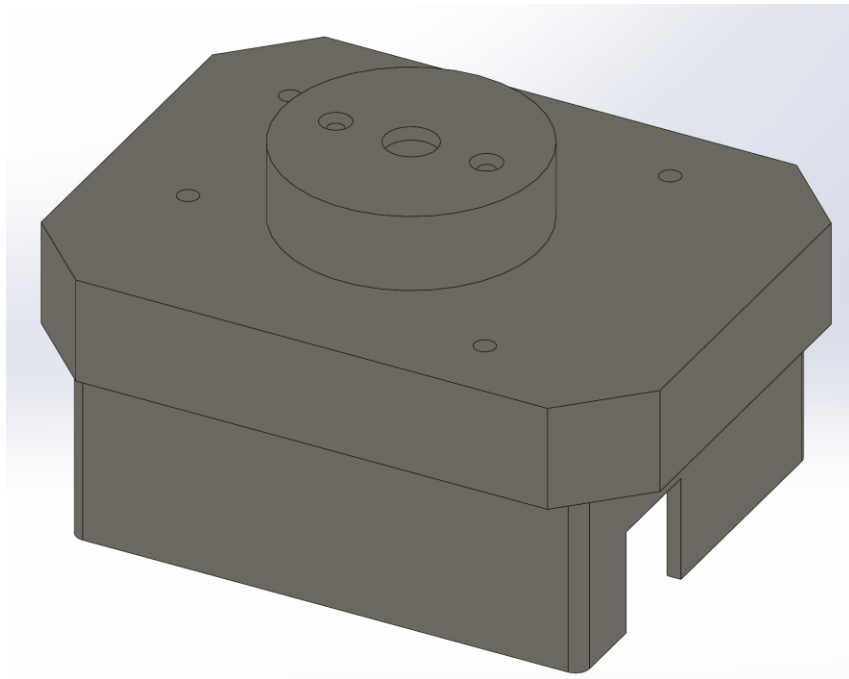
Custom designed robot chassis for the second prototype.
